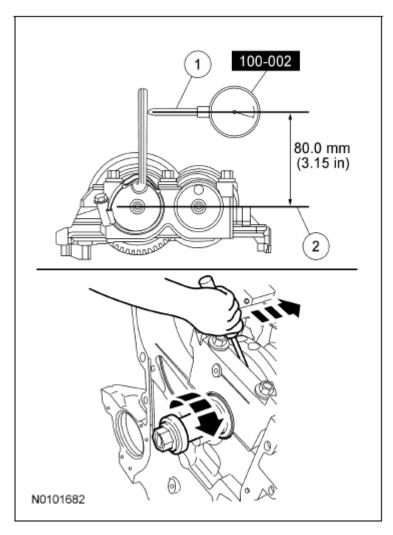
Measuring Gear Backlash Courtesy of FORD MOTOR CO.
